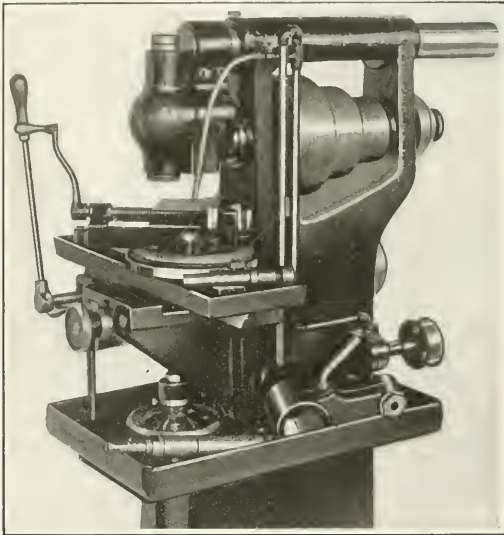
Bickford Plain Milling Machine equipped with Vertical Attachment and Swivel Vise
